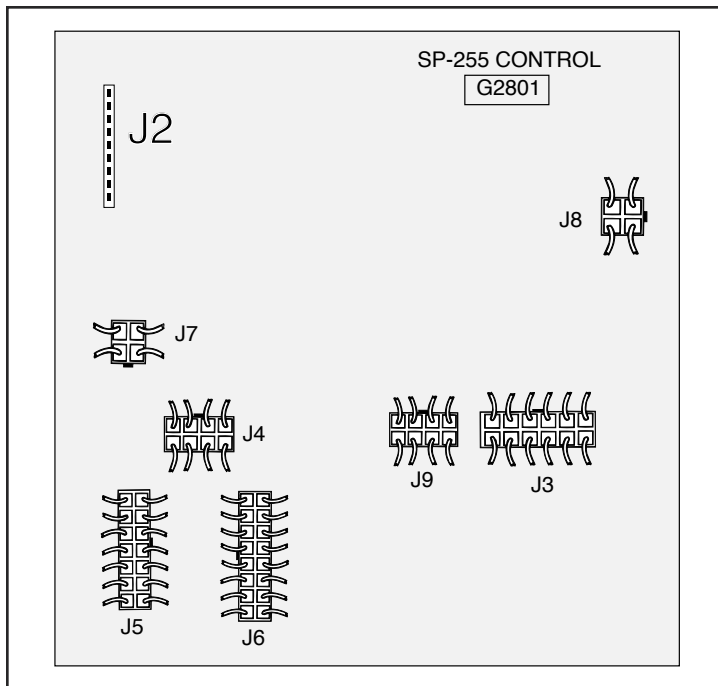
Plug J2 Location on G2801 PC Control Board.
